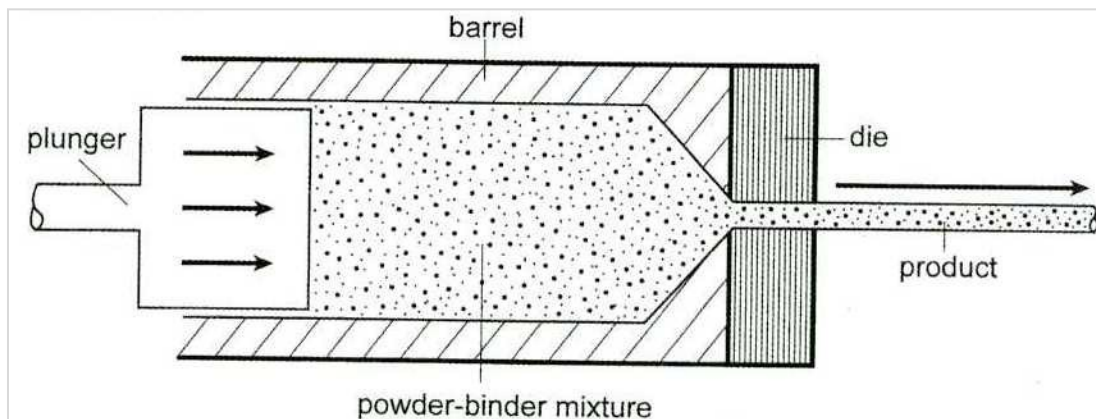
A schematic drawing of powder extrusion equipment set up [8].
